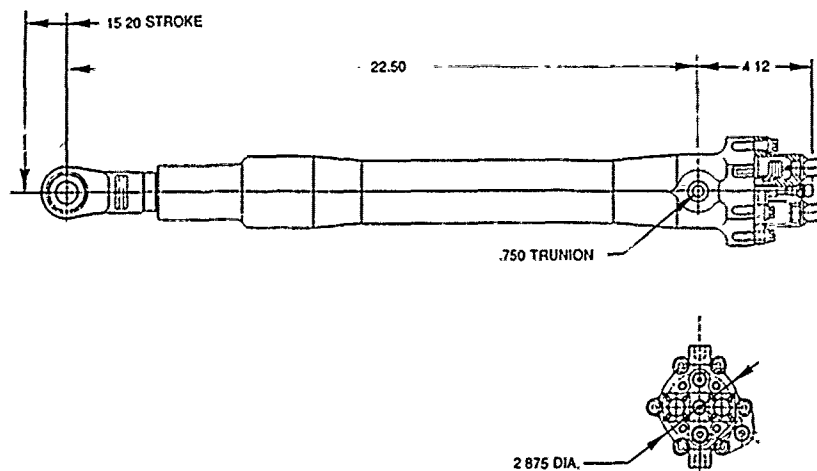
MOOG - Divergent Flap Actuator Outline Drawing
